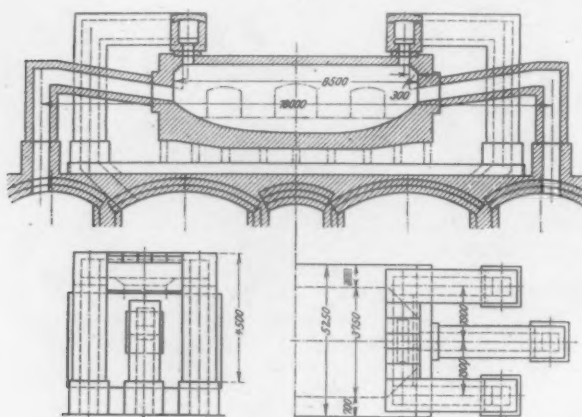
Section and Plan Showing New Arrangement on Second 40-Ton Furnace.
